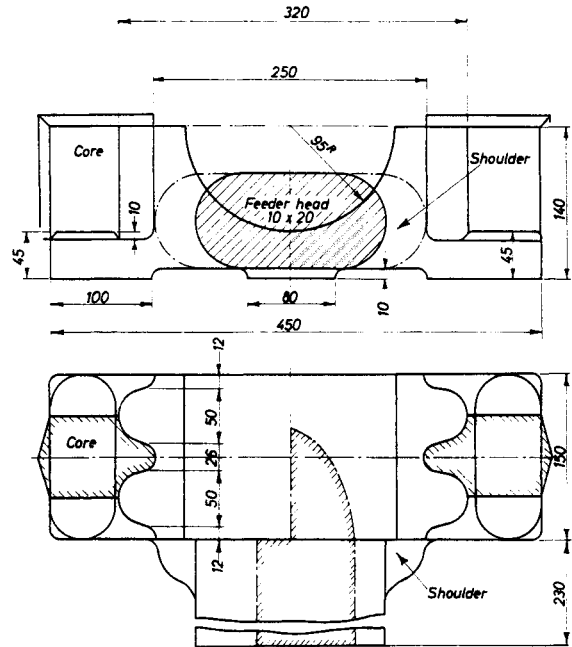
Bearing block. 1st alternative: moulded on the flat, gravity feeder with shoulder.
